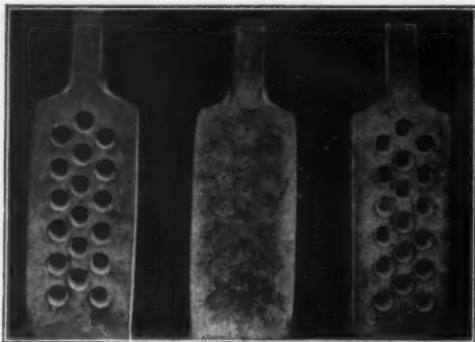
Front and Rear Views of Three Tungsten Steel Draw Plates.
